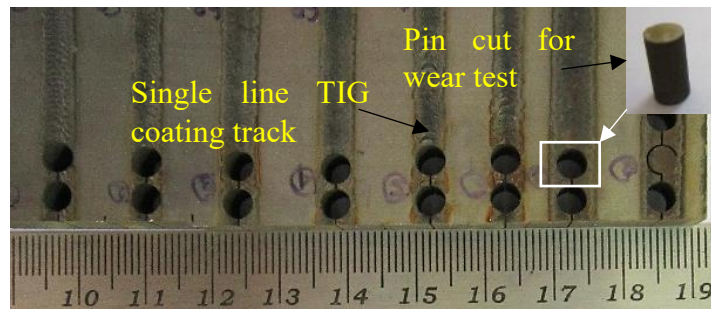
Single track coating and pin cut by wire-EDM for wear test
